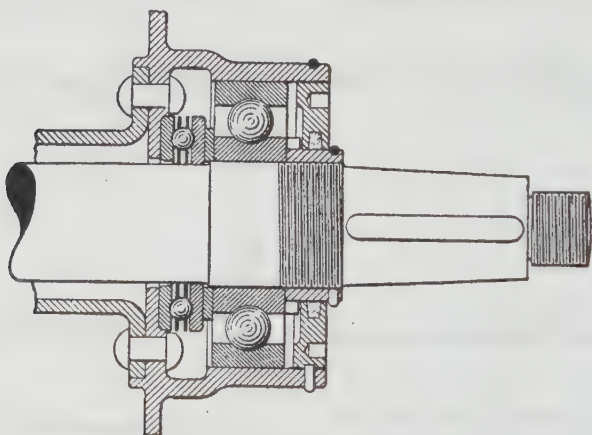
FLANGED OUTER END OF AXLE TUBE RIVETED TO COMBINED BRAKE SUPPORT AND BEARING HOUSING.
